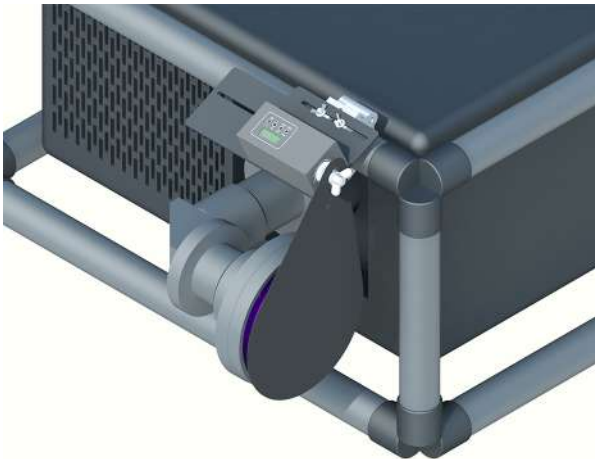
Example of a shutter mounted to cover a lens bending to the right of the projector
